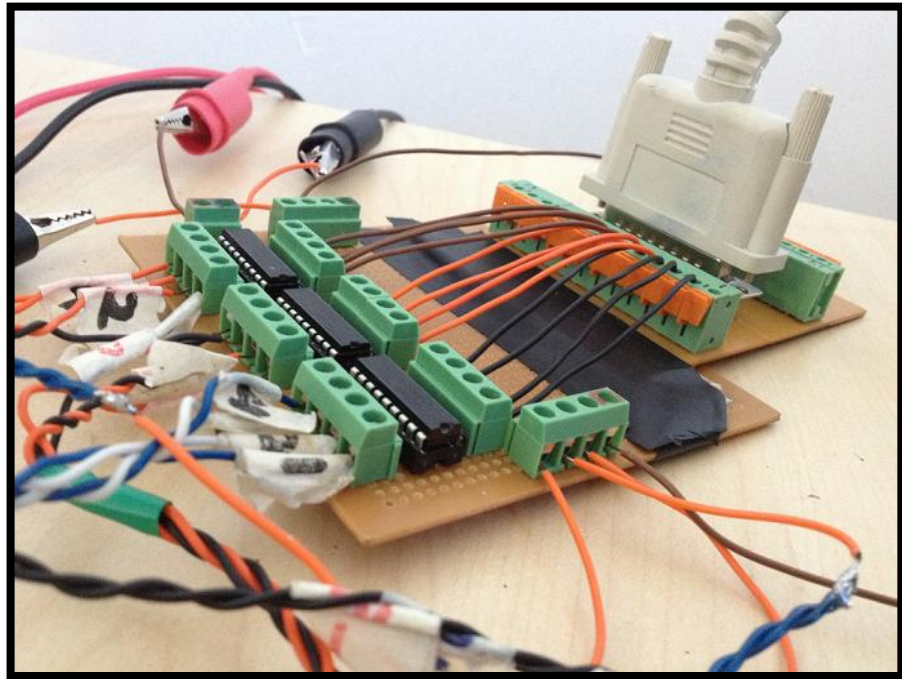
The final Circuit that has been soldering on Donut Board
